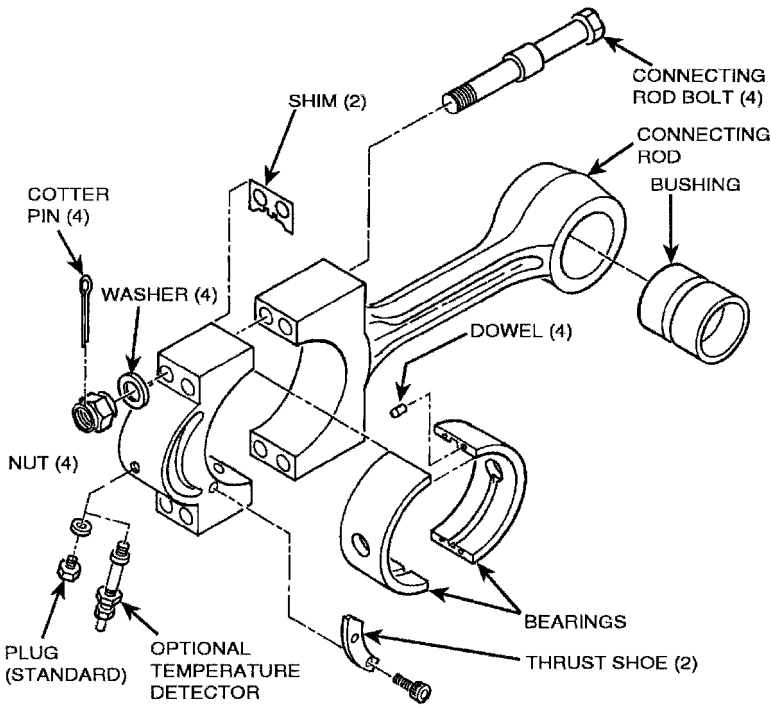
Component parts of a typical connecting rod. (*Dresser-Rand Company, Painted Post, N.Y.*)
